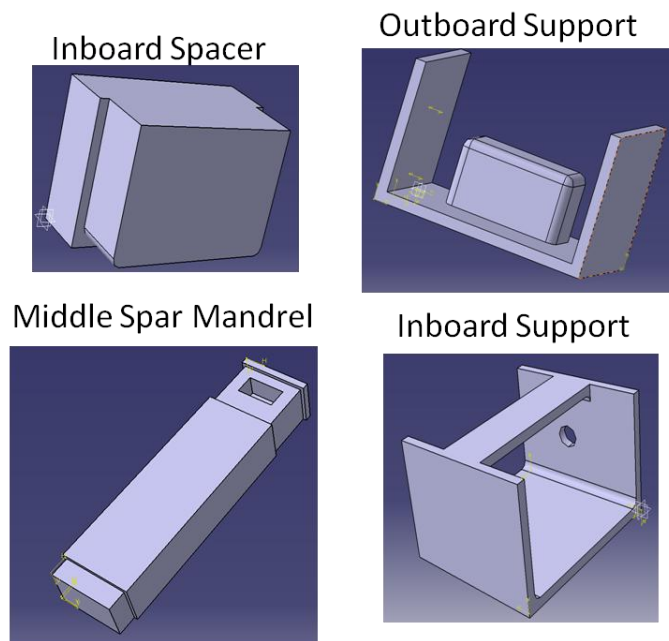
CAD Model Developed for the Parts of Spar Mandrel
